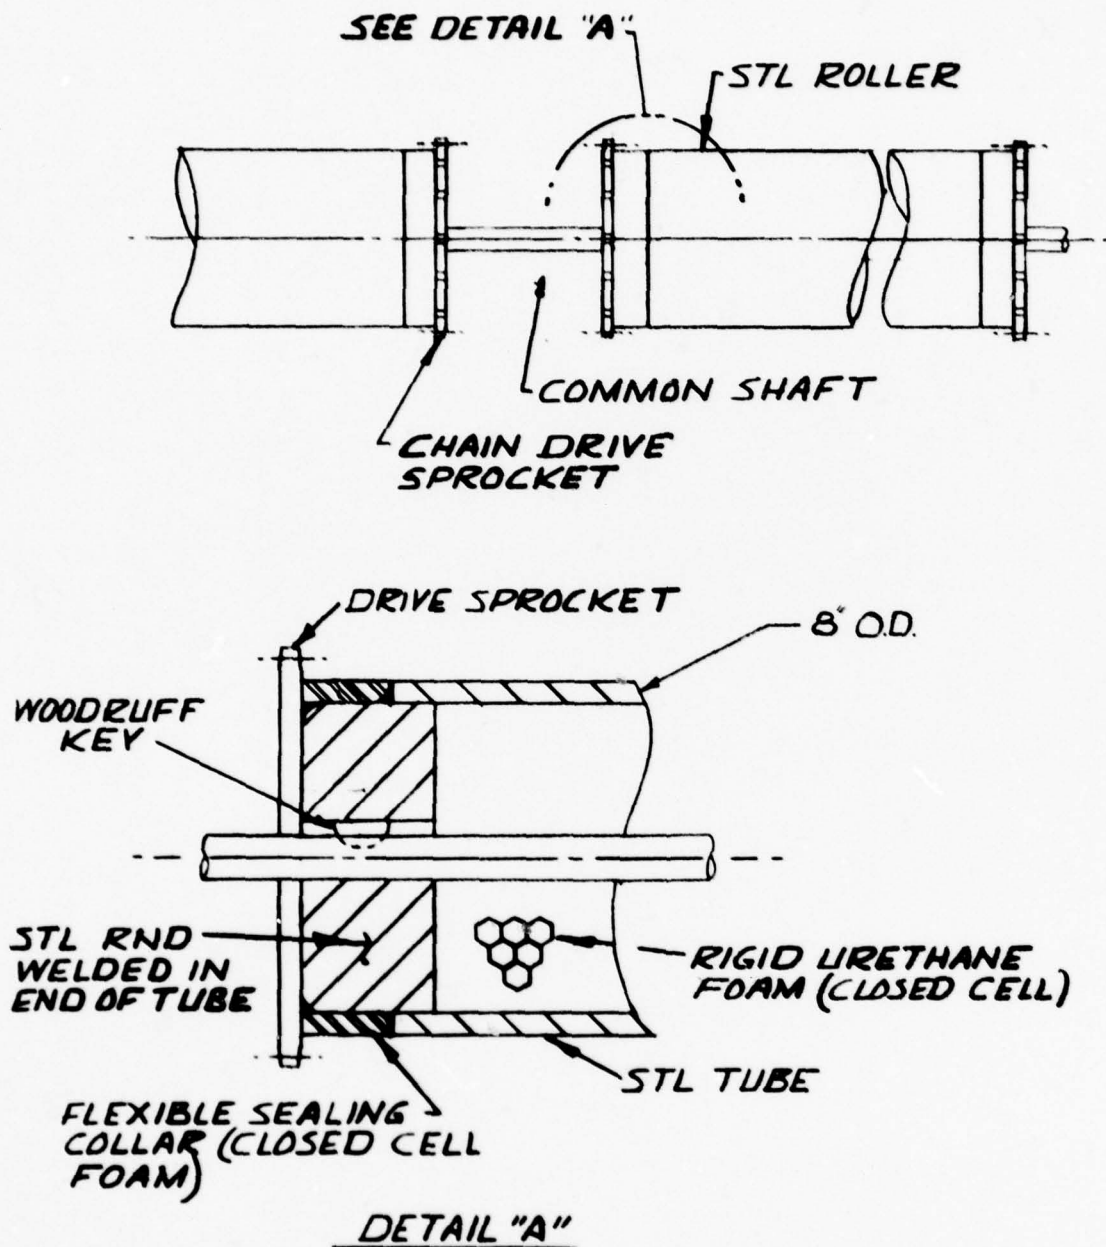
REAR DRIVE ROLLER CONSTRUCTION
